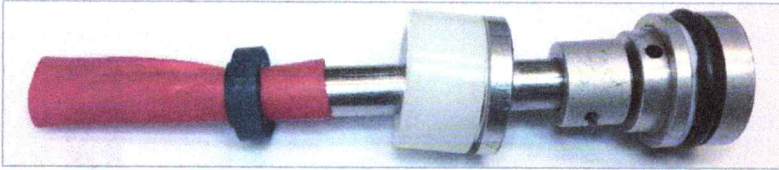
COMPRESSION RING installed onto PISTON ROD GUIDE BUSHING.
